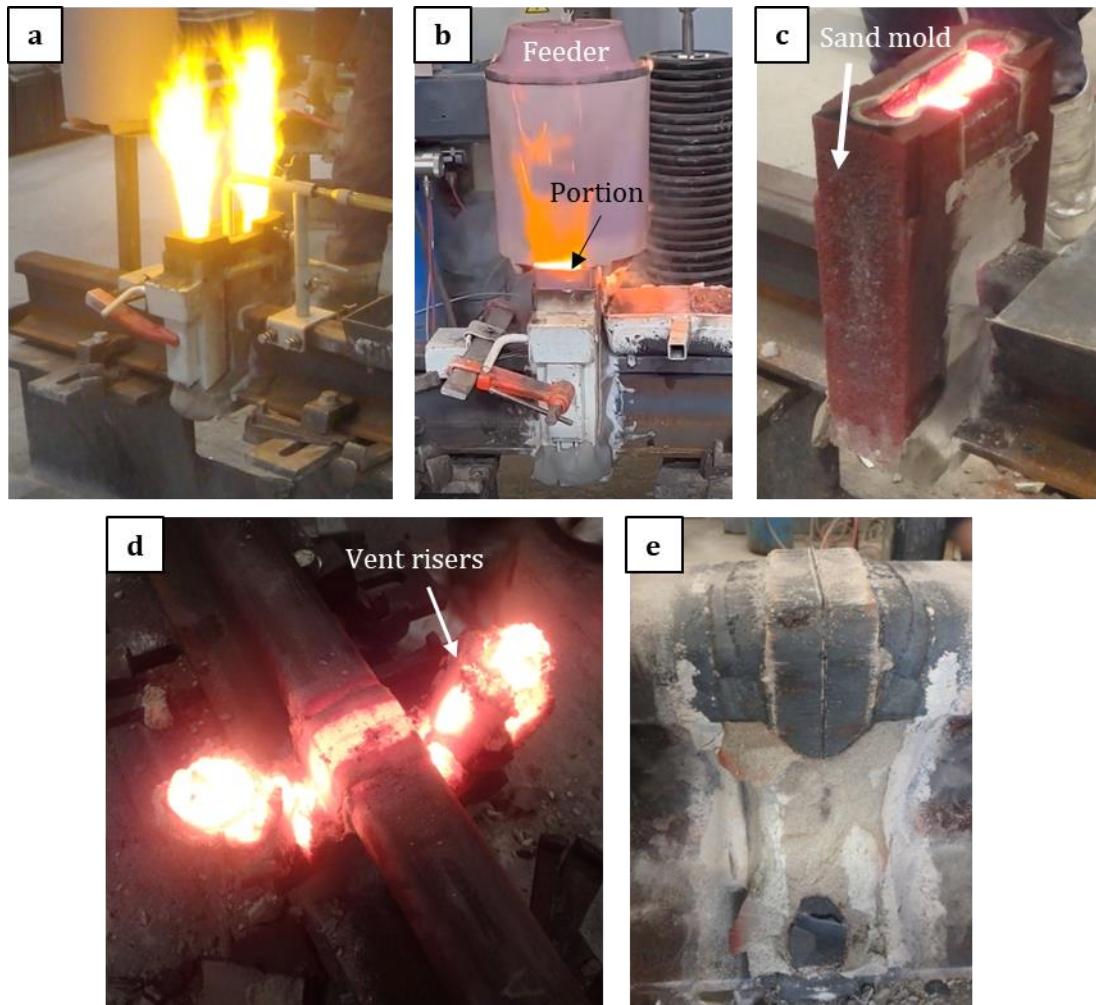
Thermite welding process steps: a- Preheating, b- Casting c- Cooling with sand mold and feeder, d- removal of the feeder and e- natural cooling
